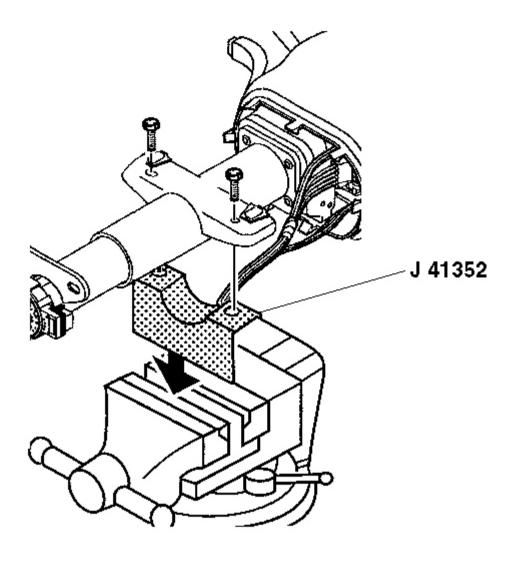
Installing Steering Column Onto J 41352 Courtesy of GENERAL MOTORS CORP.
